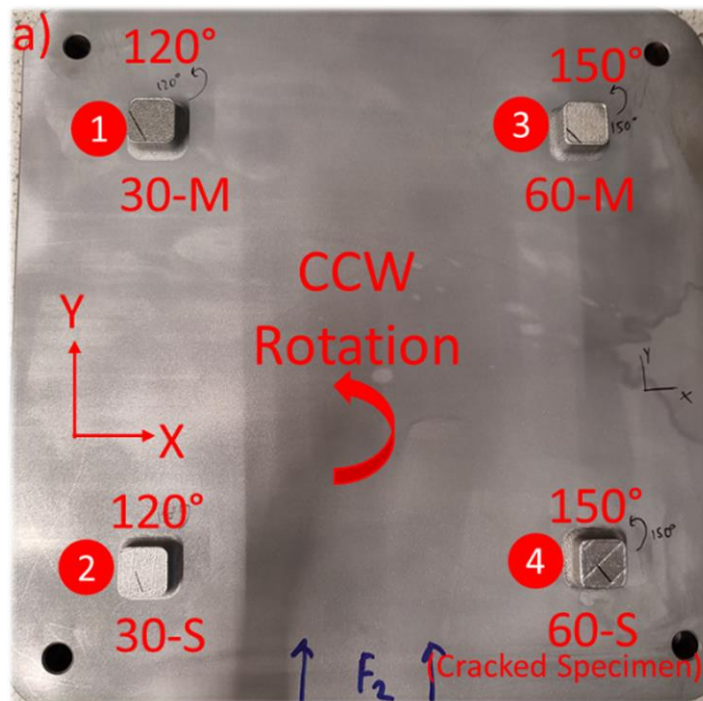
30-M (specimen#1), 30-S (specimen#2), 60-M (specimen#3) and 60-S (specimen#4) specimens a) top view
